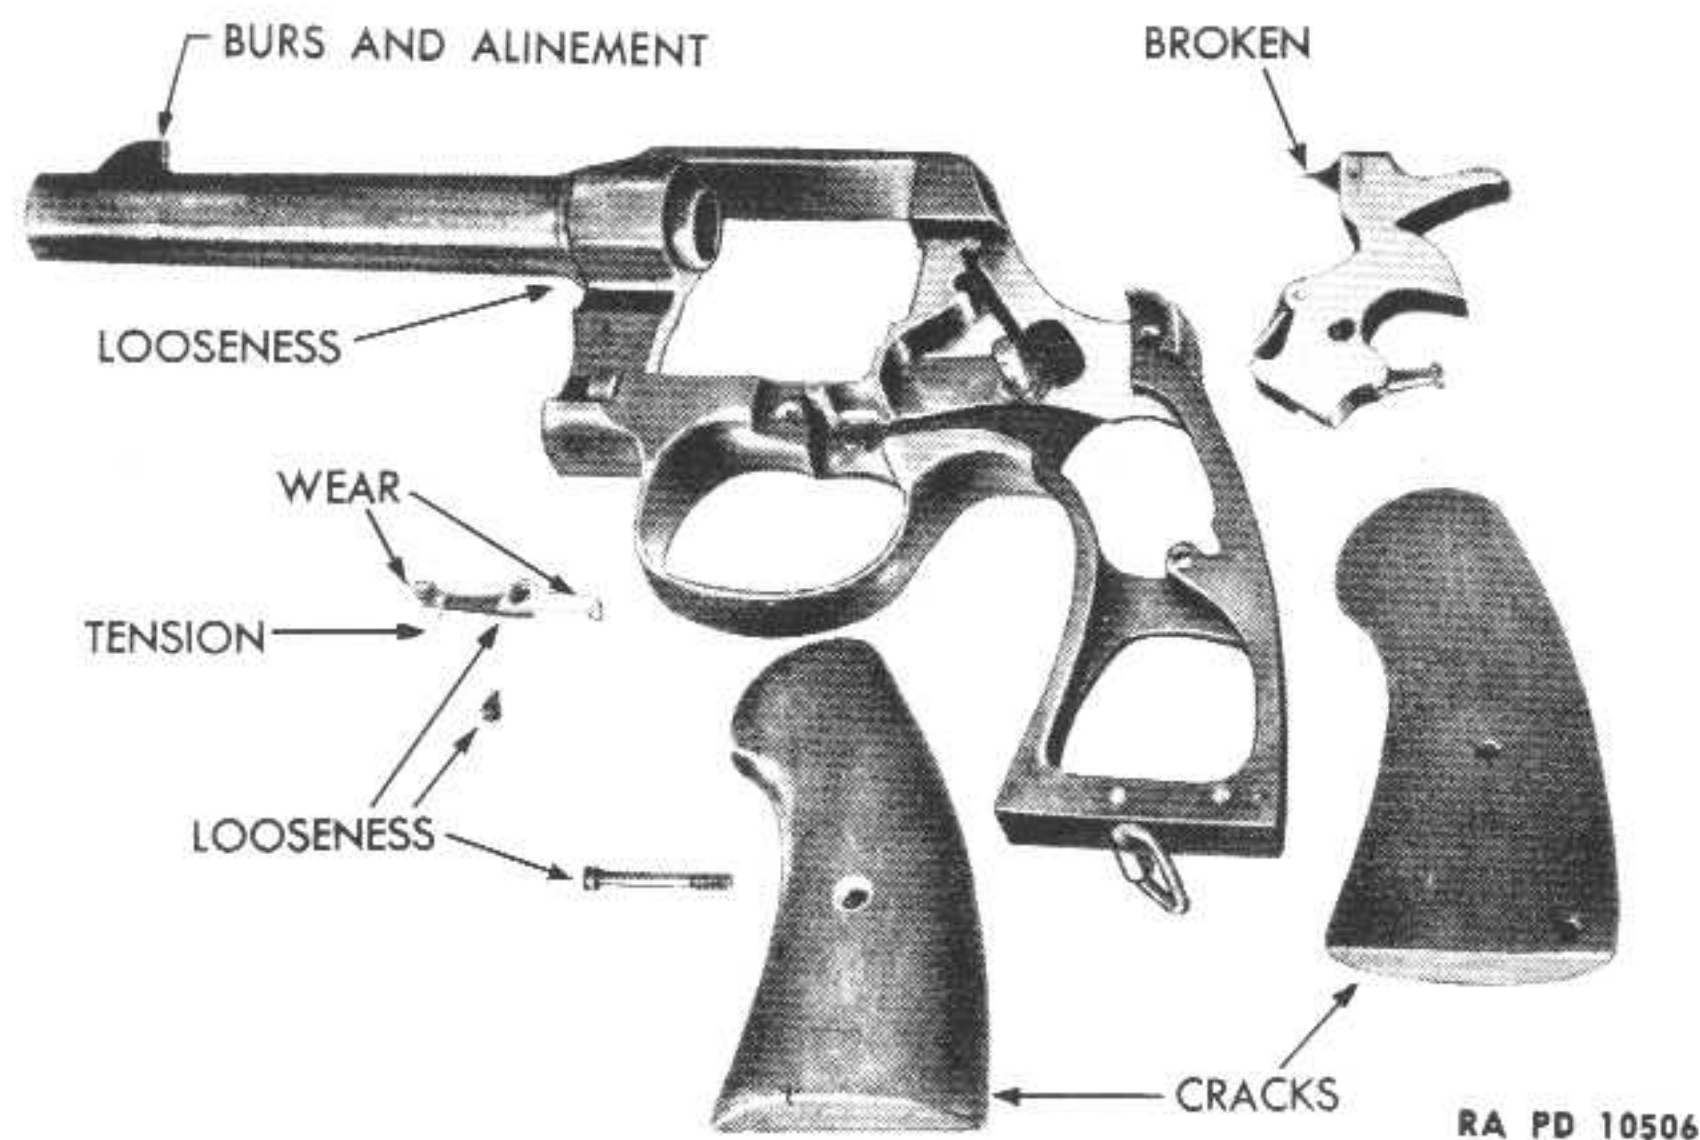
Colt Revolver M1917, Hammer, Cylinder Bolt, Stocks, Front Sight and Barrel, Showing Points to Be Inspected
